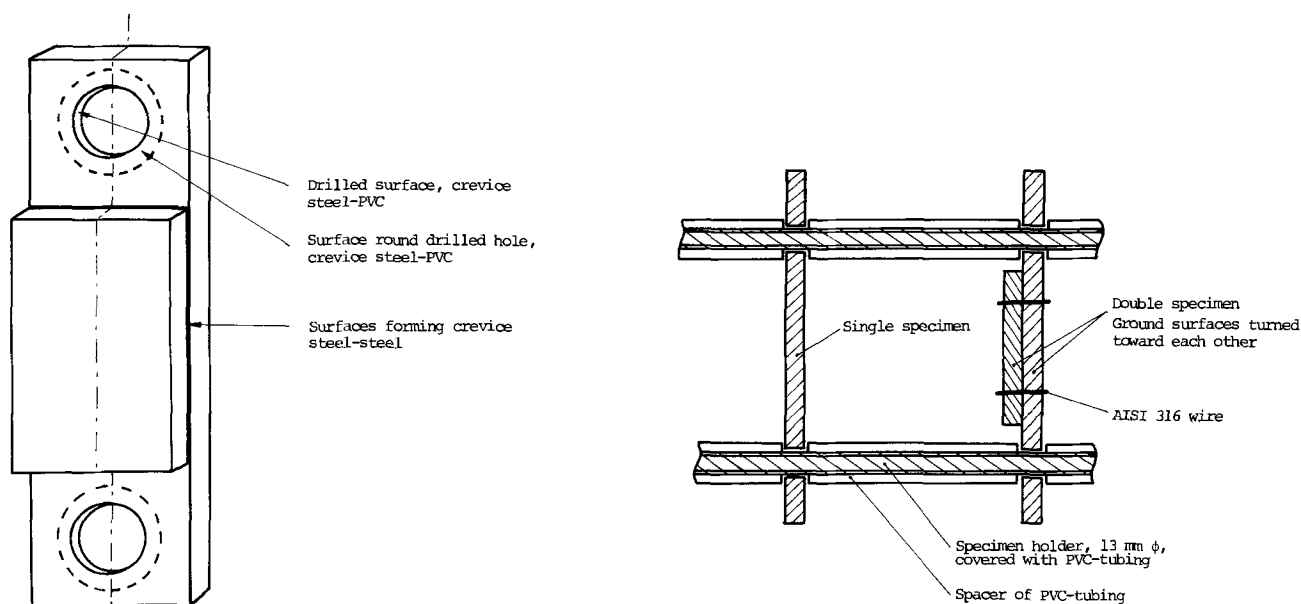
Mounting of field test specimen; Fig. 2a (right) is double specimen section
